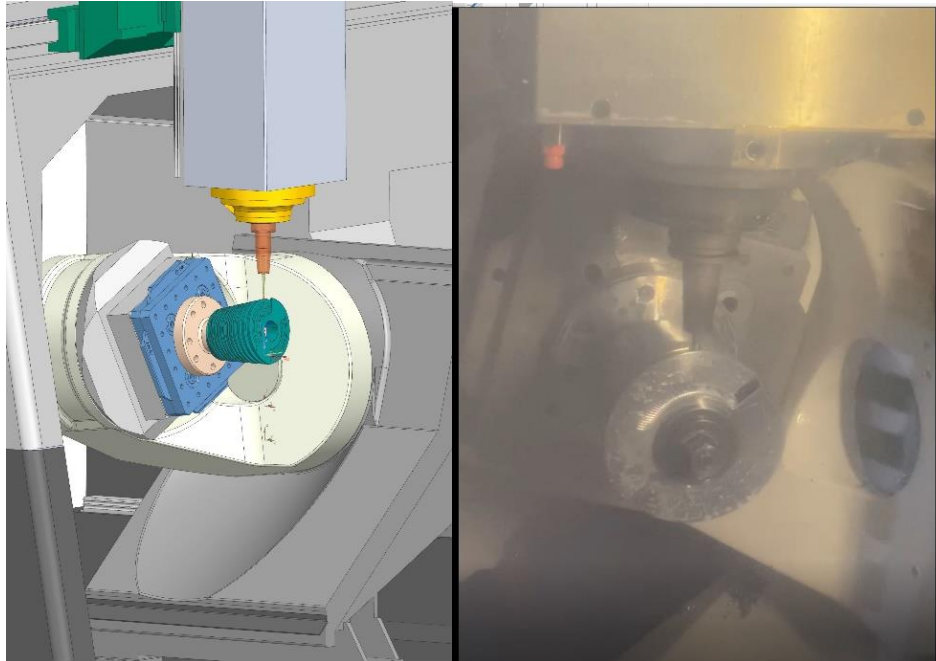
Programming and manufacturing the spindles by 5-axis machining.
